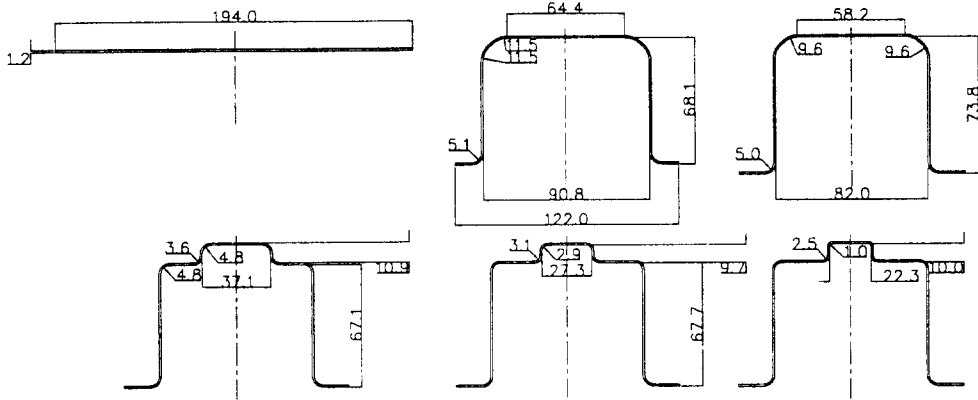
Sequence drawing for the deep drawing parts of the "Motor Housing" using rule 12-18)
